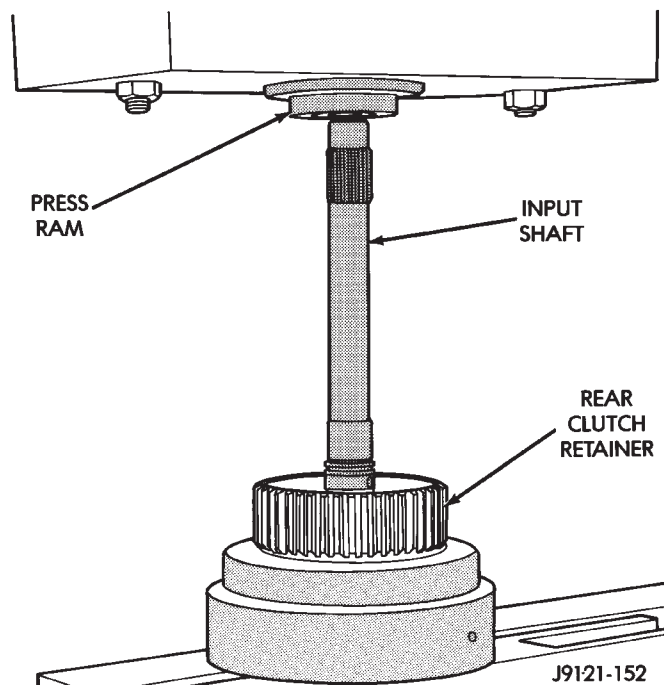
Pressing Input Shaft Into Rear Clutch Retainer
